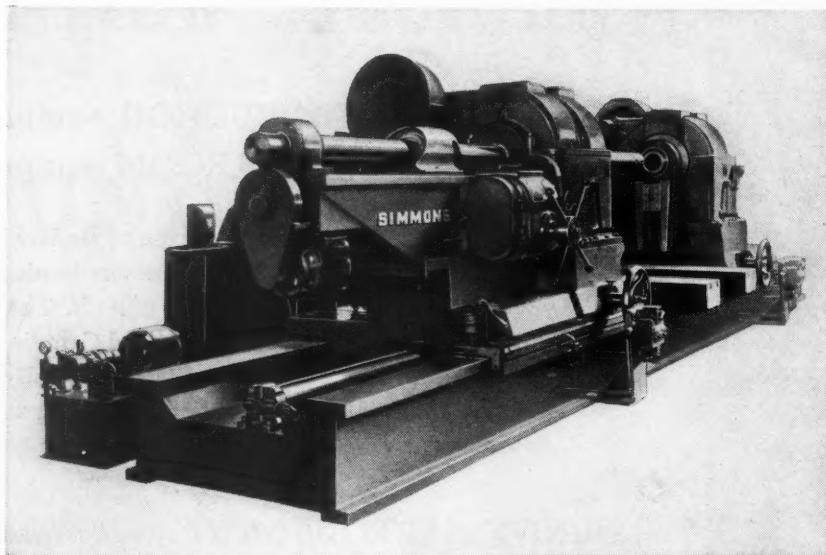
Simmons double-unit horizontal boring and facing machine with fixed cross-tables
